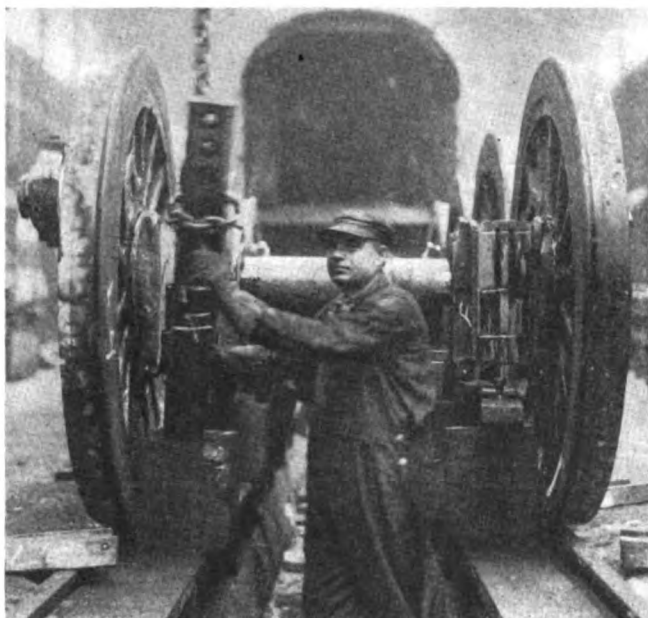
The pedestal binders are placed on blocks under the driving boxes to facilitate handling
